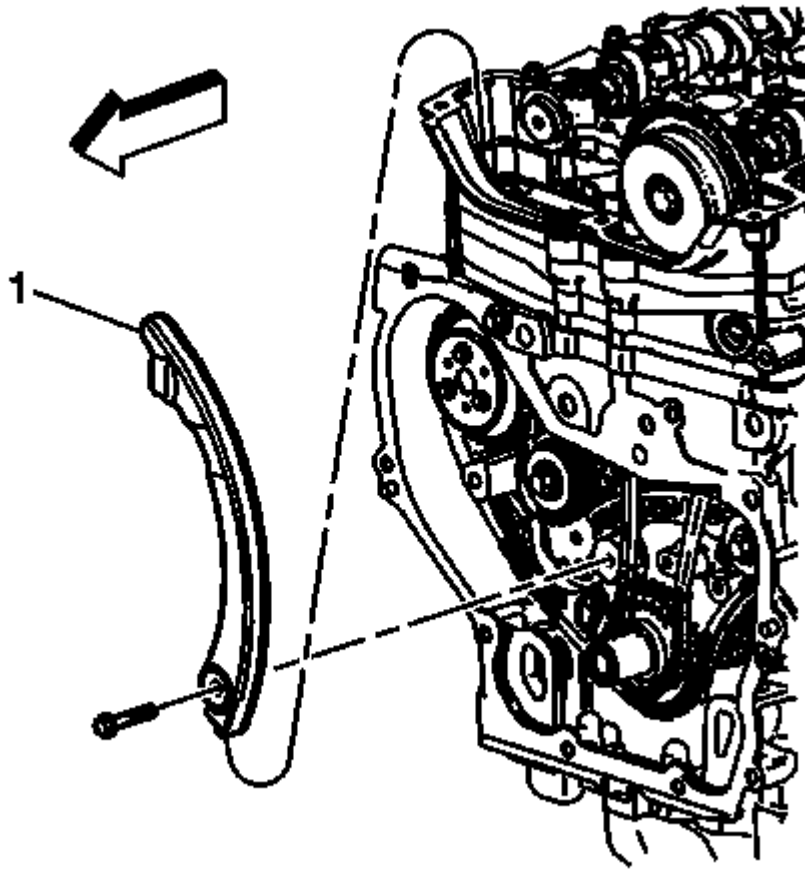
View of Adjustable Timing Chain Guide Bolt.
